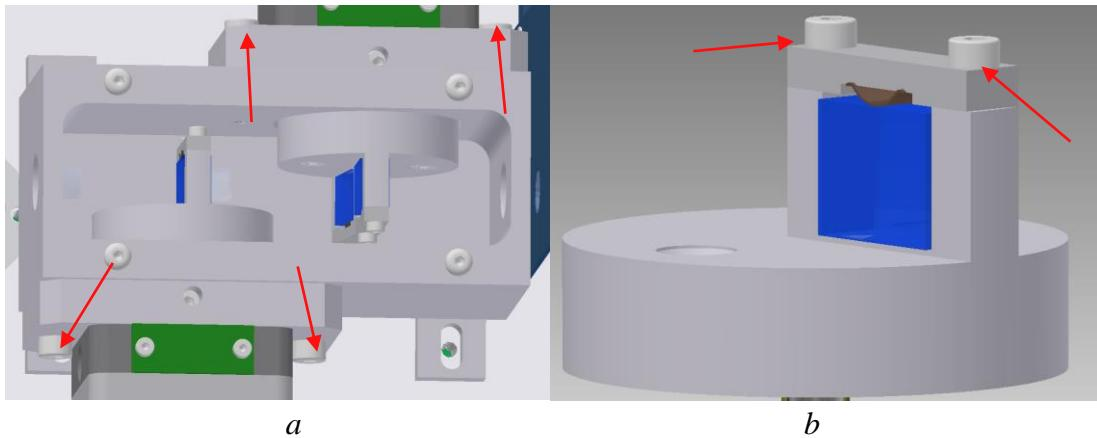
a) Motor fixing screws marked by red arrow, b) SHG crystal holder
